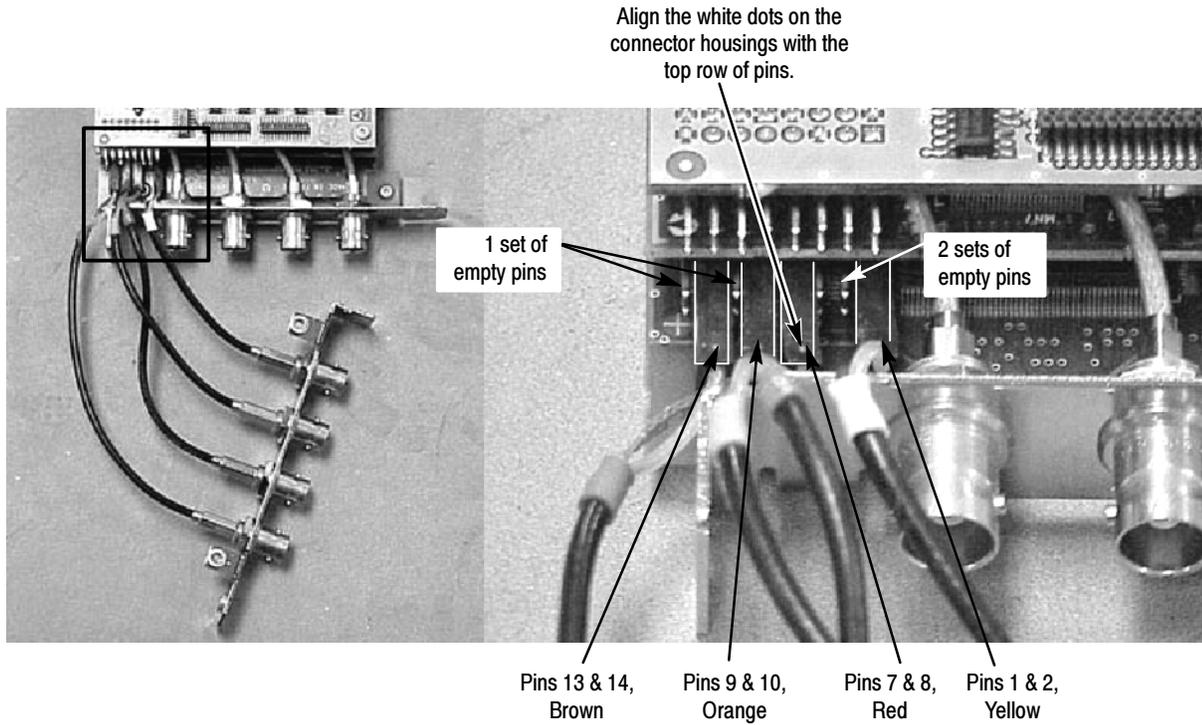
Clock and trigger cable connections for the ASI or SSI board on the PIA+ module
